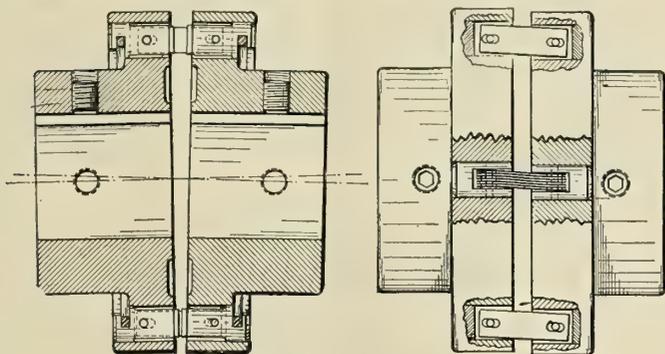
SECTIONAL VIEWS OF FRANCKE COUPLING
